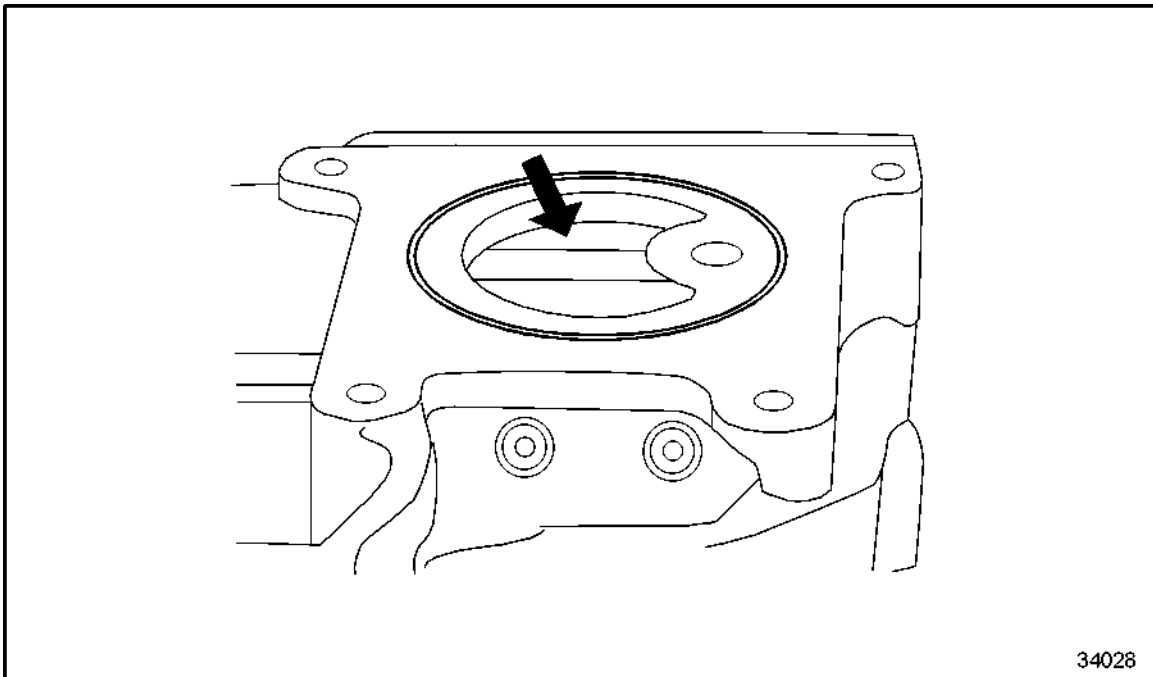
Sealing Openings in Oil Filter Housing with Suitable Plugs
